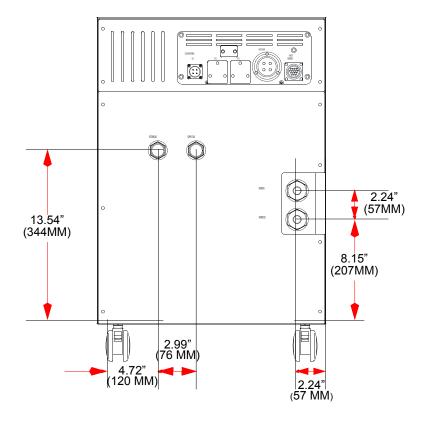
8600 Compressor Rear Dimentions, Type 02
